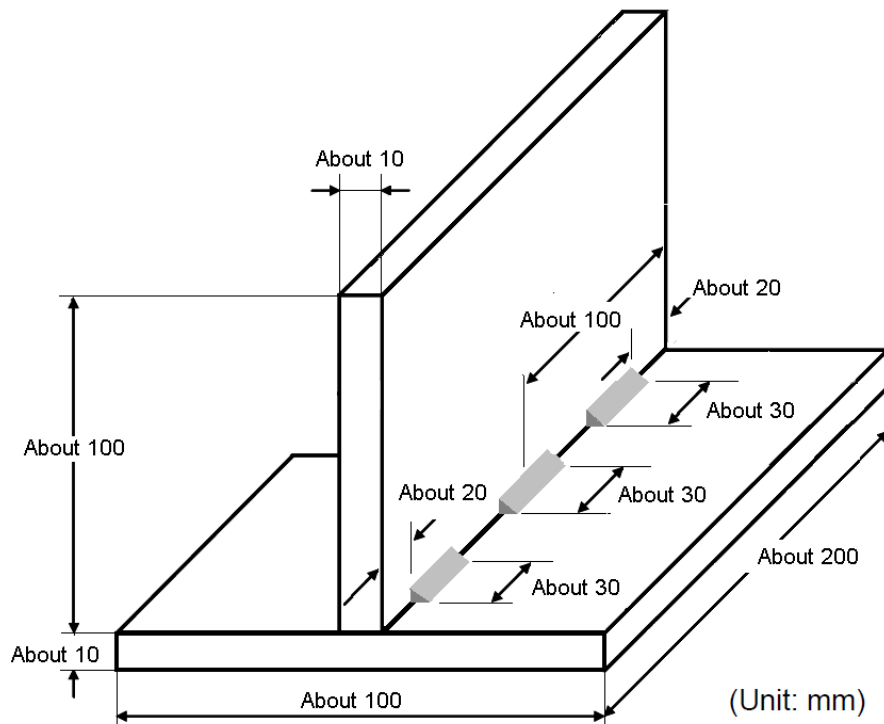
Dimensions and types of test assembly for tack fillet welds
